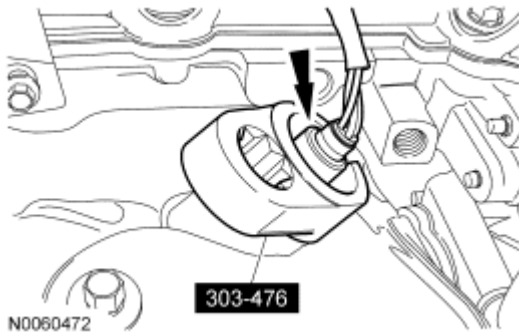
Identifying RH HO2S & Special Tool (303-476)
